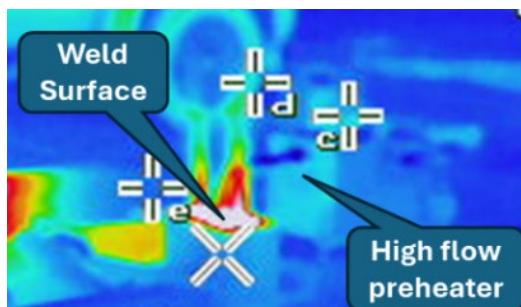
Thermite weld with mold removed. Weld surface and high flow preheater are marked in the image.
